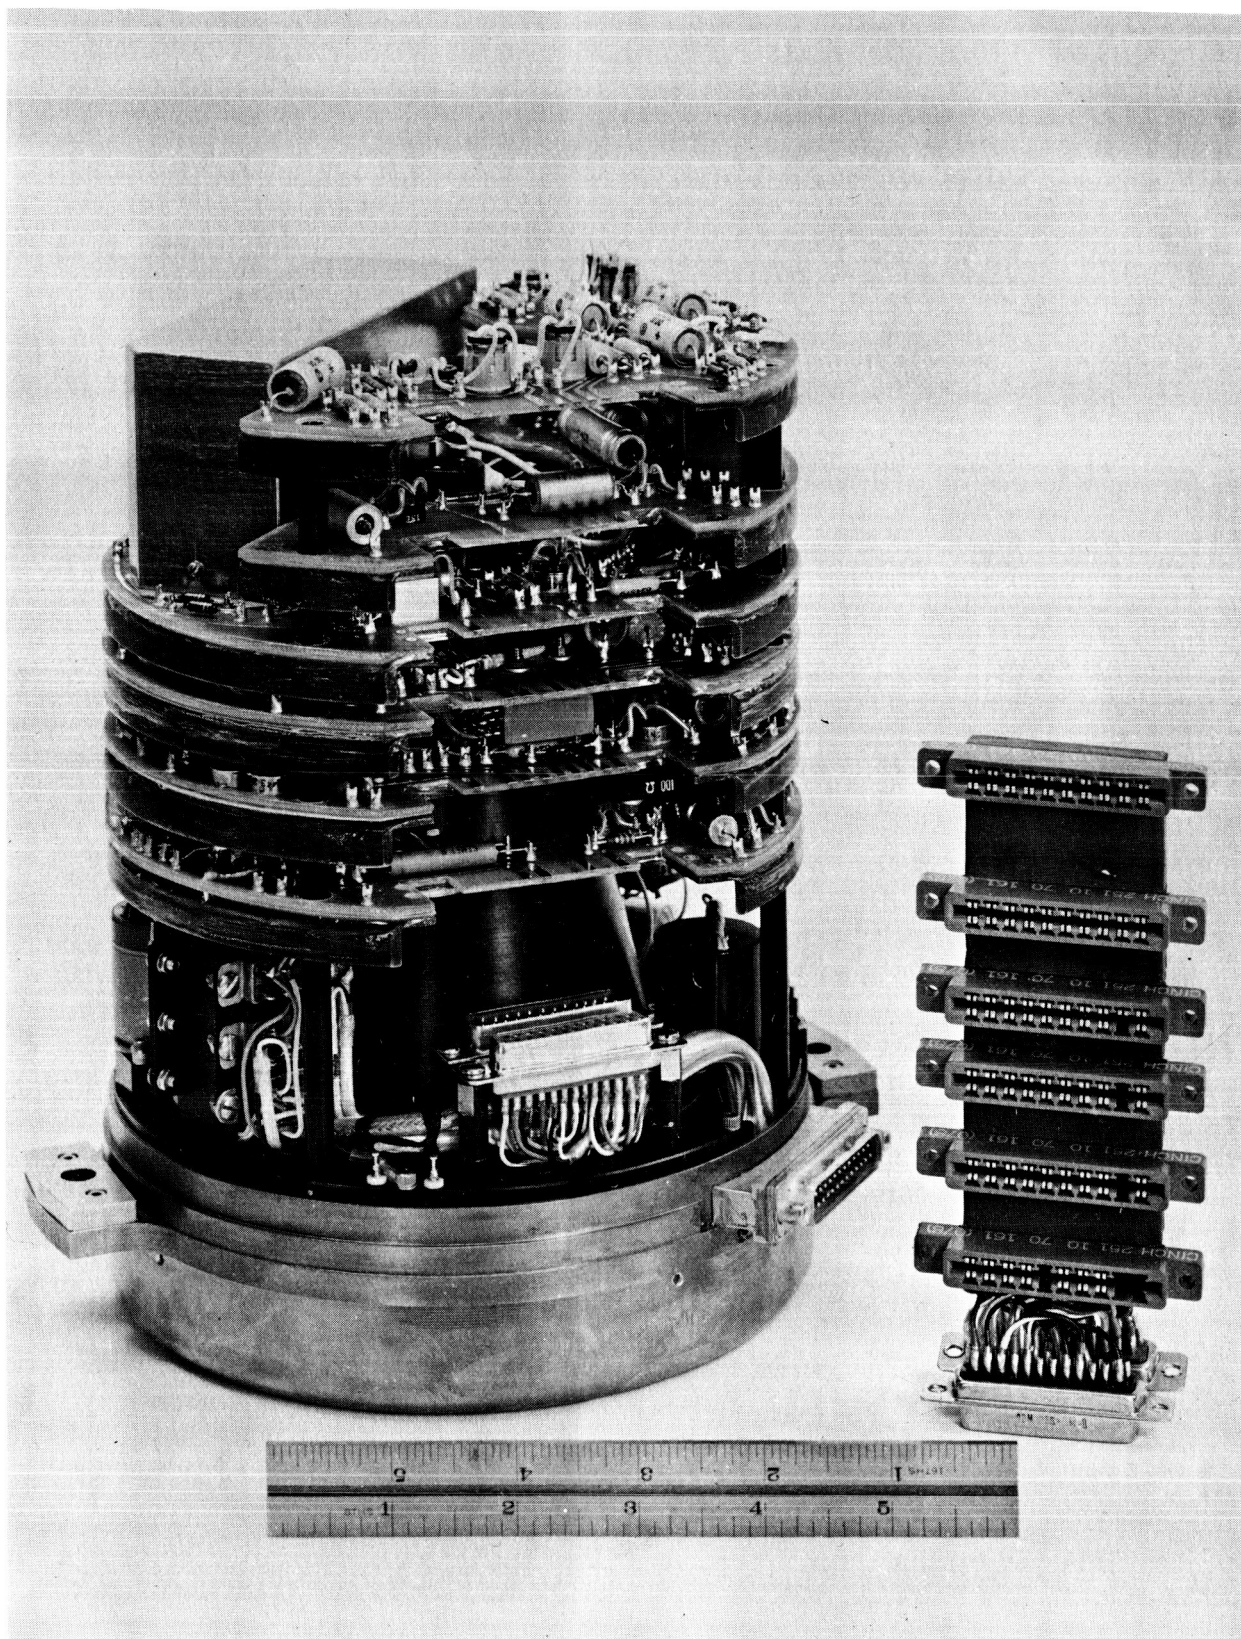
HORIZON SCANNER ELECTRONICS ASSEMBLY
